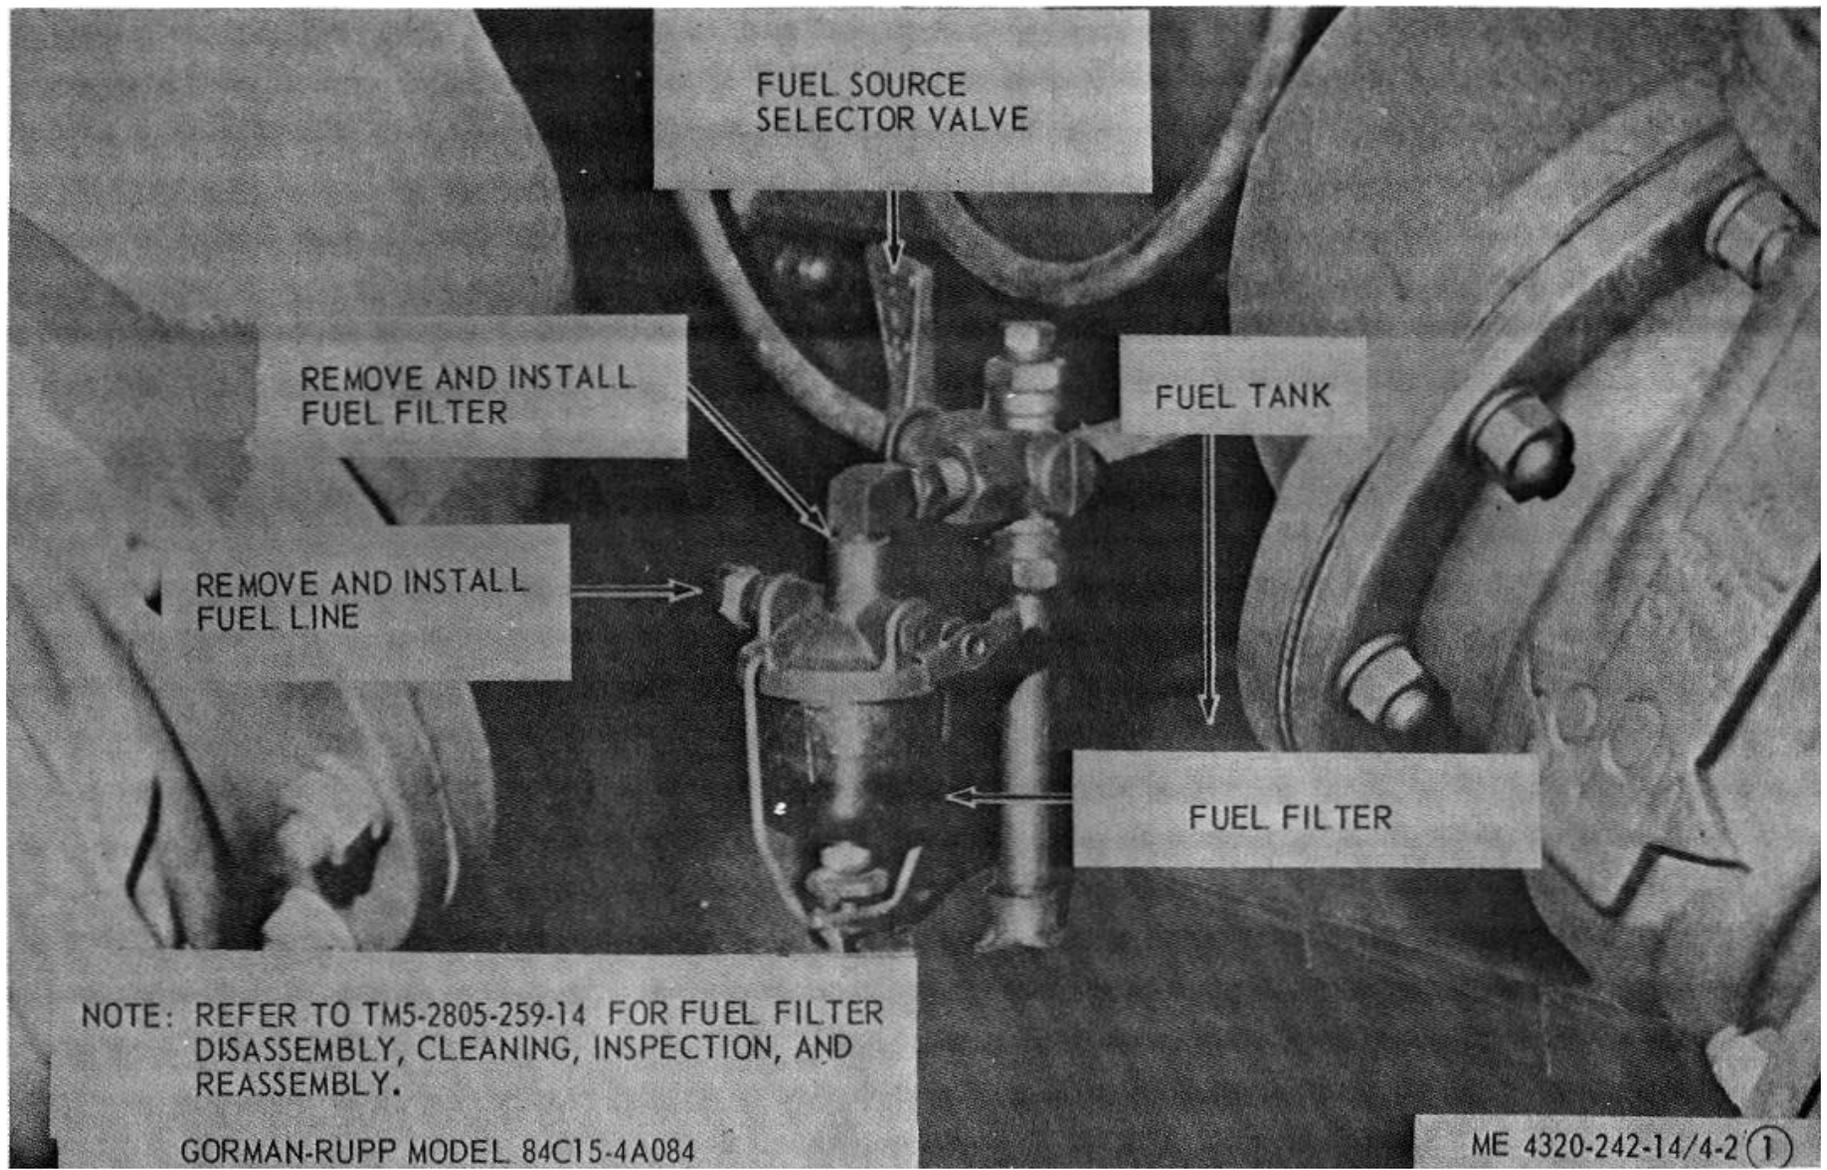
Fuel filter, removal and installation Model 84C15-4A084. (Sheet 1 of 2).
